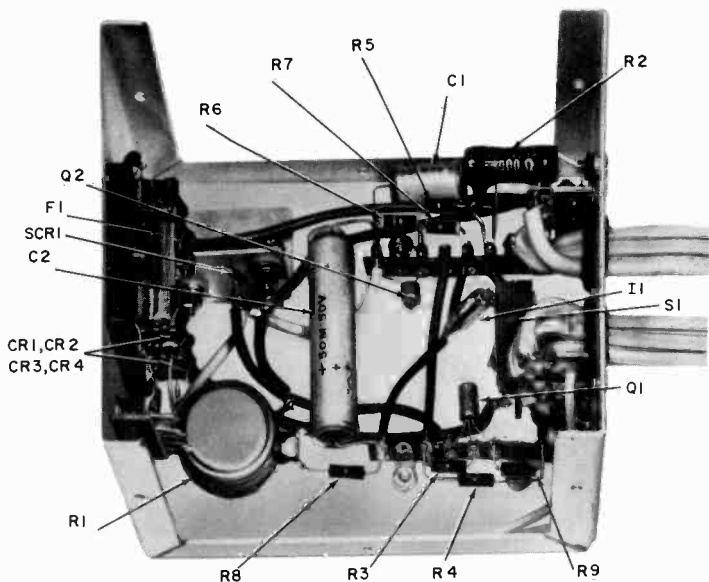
The flasher assembled in a 3- by 4- by 5-inch chassis.
